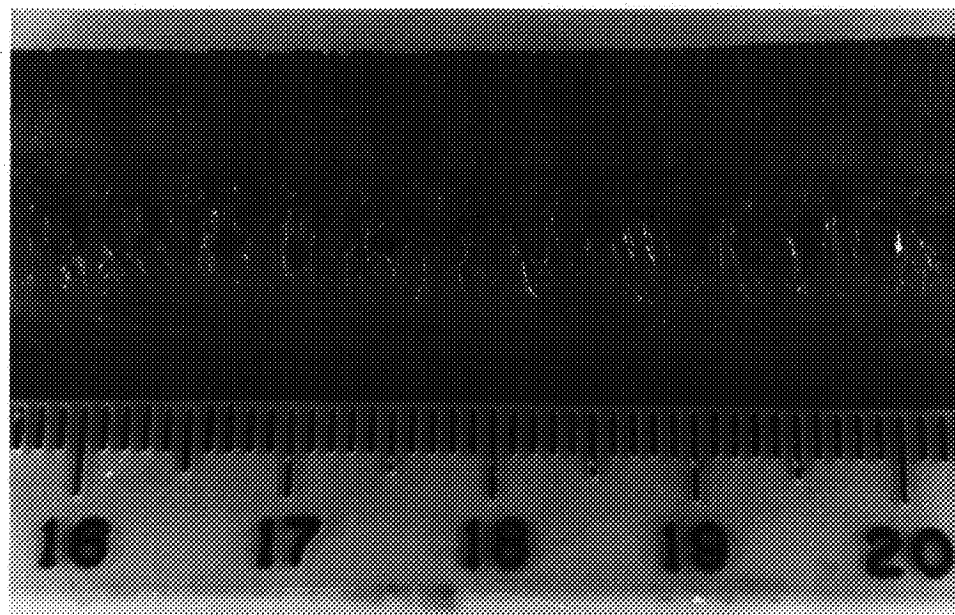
shows the weld surfaces of sample 1' and 1 made with the original cup. After the shield flow rate was reduced from 1120l/hr (40CFH, weld 1) to 560l/hr (20CFH, weld 1'), the weld became defective and obviously unacceptable. Weld sample 2, made with cup 2 is shown in Figure 43, and weld 3 with cup 3 is shown in Figure 44. Although welds 2 and 3 only consumed half the shield gas that weld 1 did, their surfaces still look shiny and smooth, indicating adequate shield gas.
